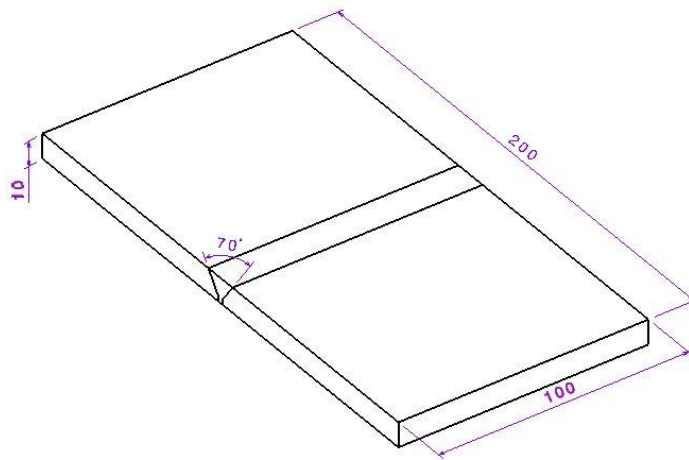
Joint PreparationFig 3: welded specimens
